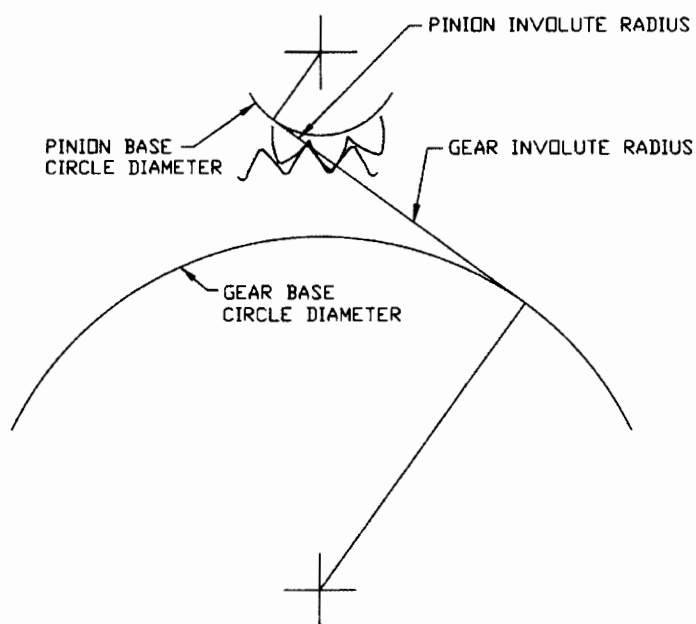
MEGAGEAR® 33.7° PRESSURE ANGLE GEARS
